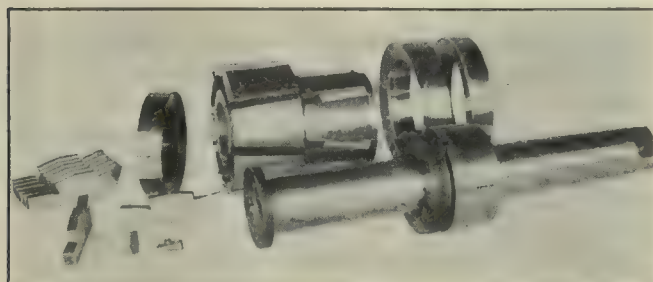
DISASSEMBLED REAMER, SHOWING DETAILS
